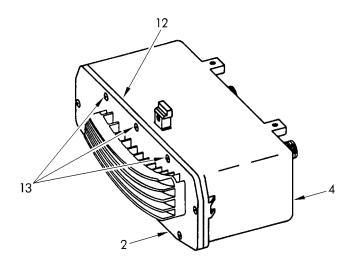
(T700, T701) Electrical Control Unit (ECU) and Scroll Seal; Inspection
